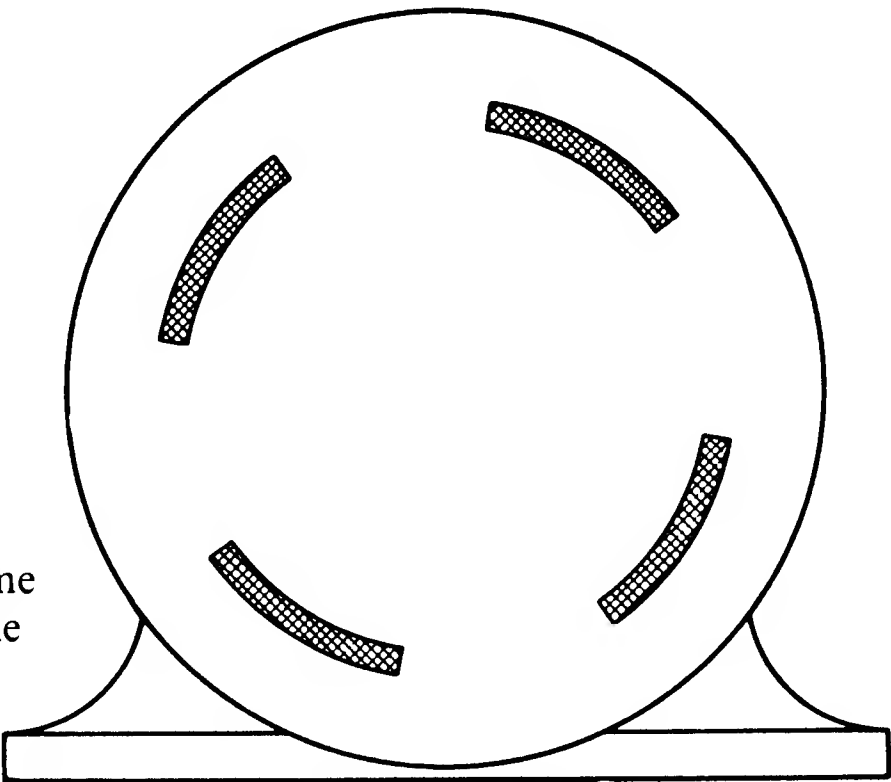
An end plate showing how the brush holder is moved to reverse the motor.
